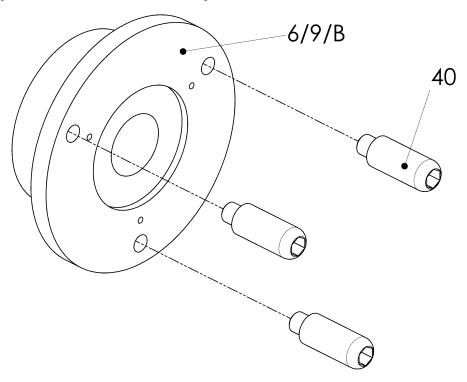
Prepare the hub/adapter/flange (6/9/B) for mounting (Type 008A-00001..00250-.S..)
